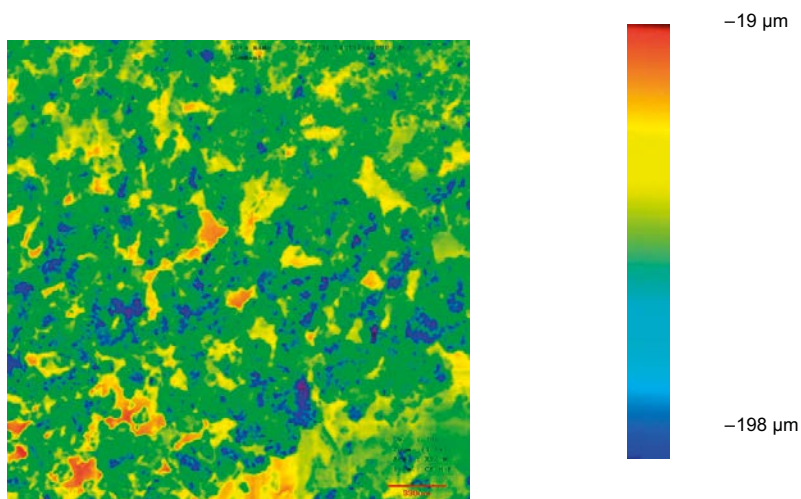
Weld (advancing) on copper material 52/3. The imaged size is 2.6×2.6 mm.
